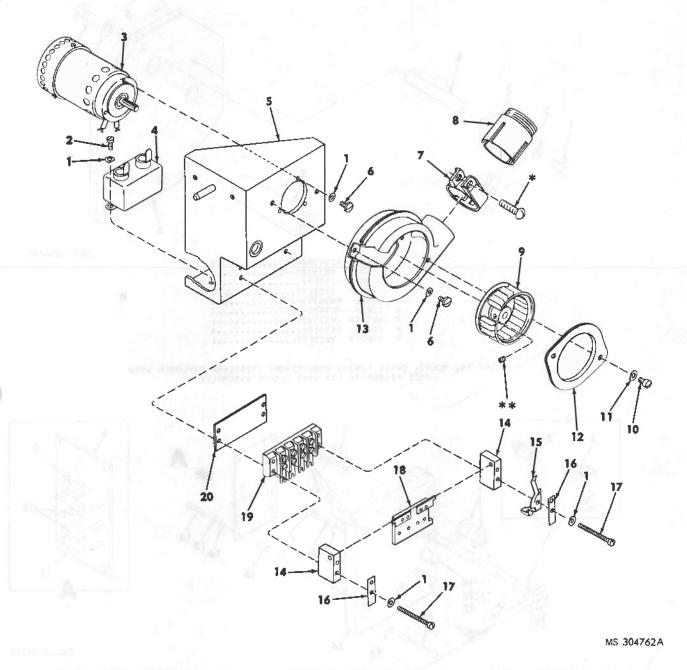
AIR DUCT /10668224/-EXPLODED VIEW /SEE FIGURE 75 FOR NEXT HIGHER ASSEMBLY/
